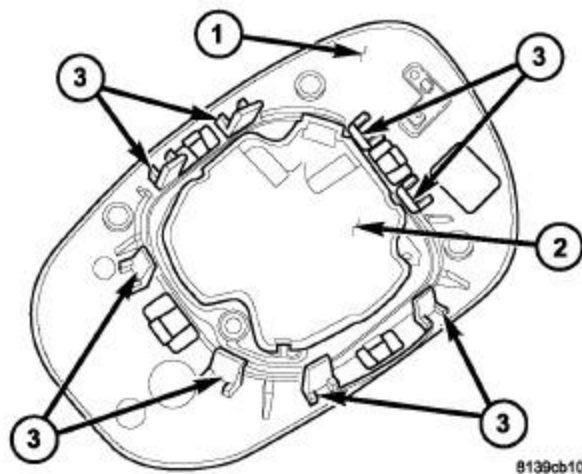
Mirror Glass Holder, Retaining Clips & Motor
